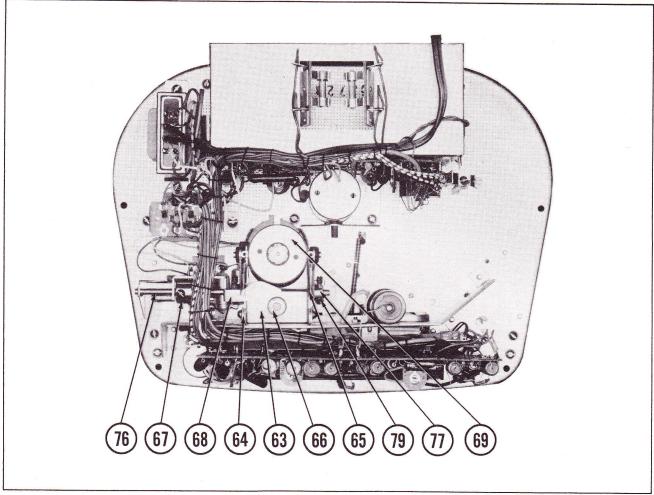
BOTTOM VIEW OF MECHANISM WITH FLYWHEEL REMOVED.
